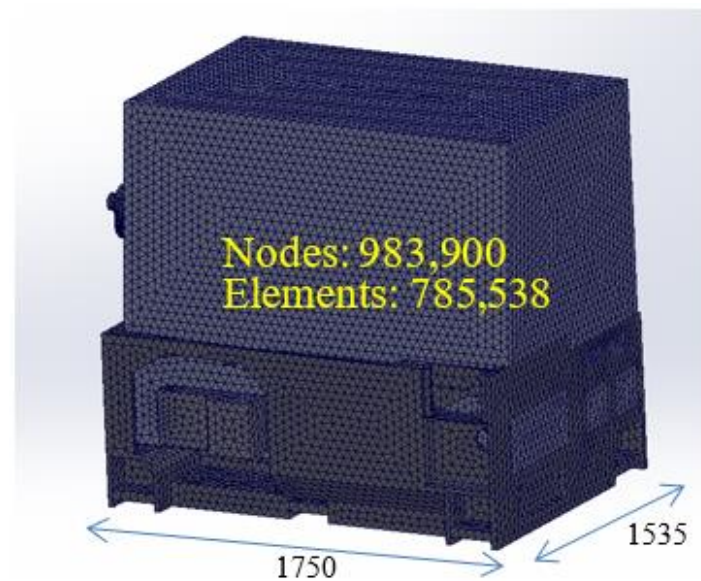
Schematic view of FEM model with meshing in CNC lathe with total enclosure
